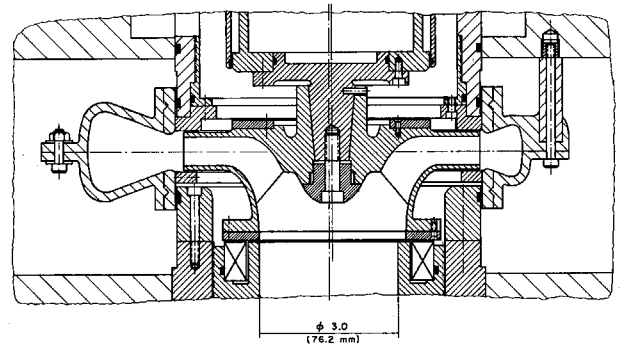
Assembly drawing of Impeller X and Volute A installed in the test section.
